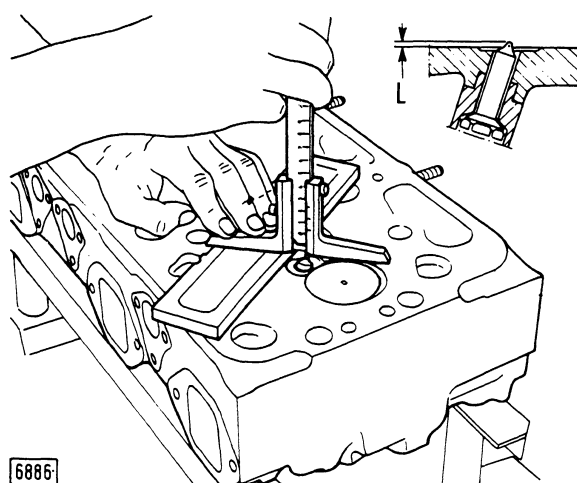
Checking injector nozzle stand-out from cylinder head.
